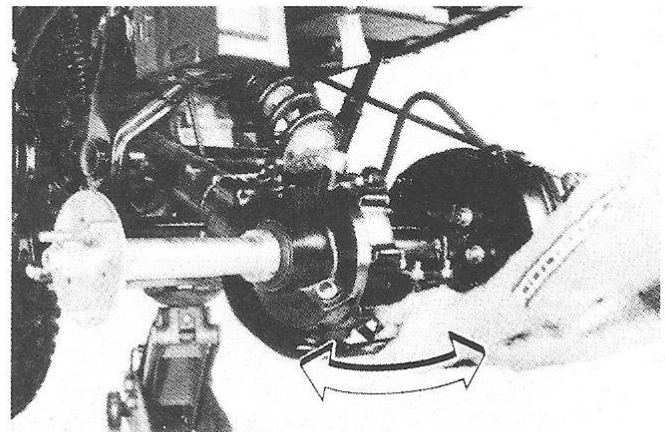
Checking the swingarm bearings for wear (Sec 28)
